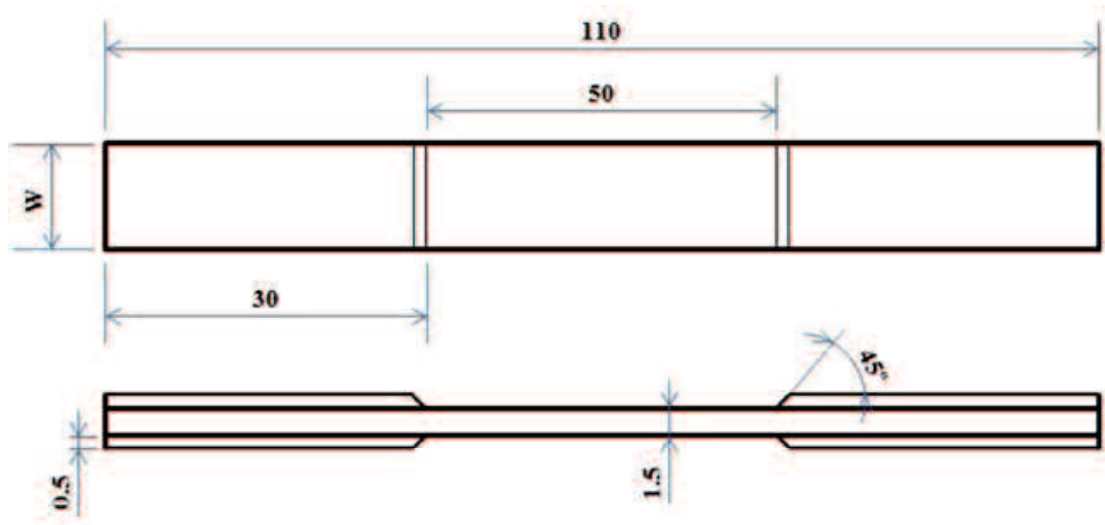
Specimen shapes and dimensions ( $W=16$  mm for tensile specimen;  $W=10$  mm for fatigue specimen).
